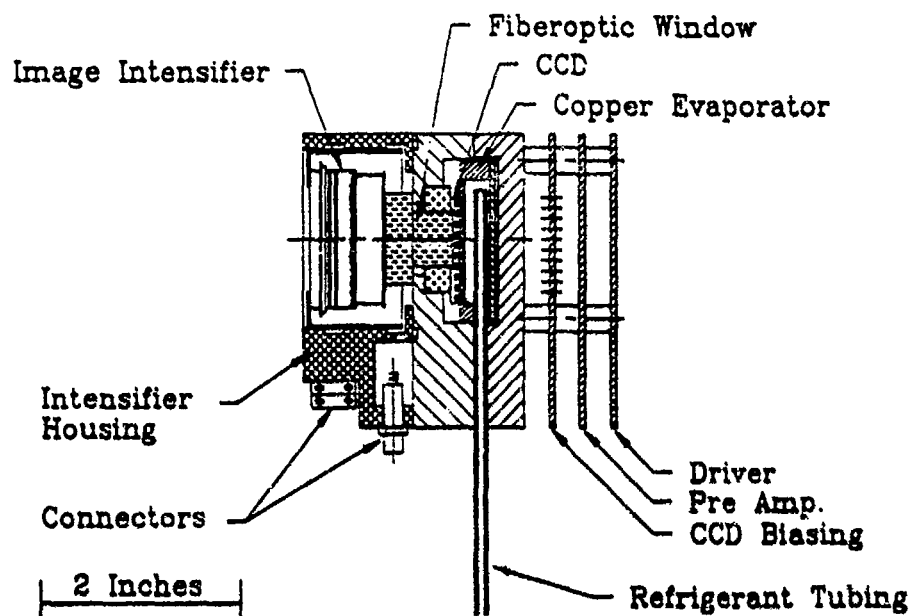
Intensifier-CCD assembly. The refrigeration evaporator is used only for laboratory testing. The AIS is passively cooled in flight.
